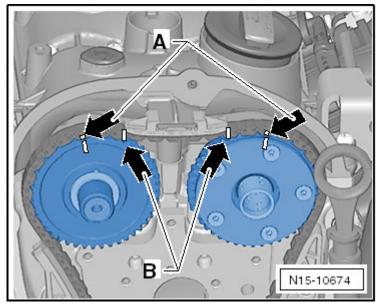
Identifying Position Marks: Drive Chain To Sprockets -A- And Drive Chain To Guide Rail -B-
